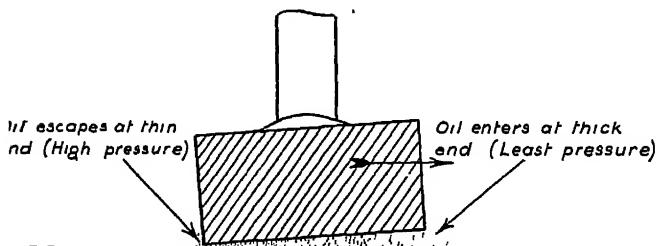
DIAGRAM SHOWING WEDGE-SHAPED OIL FILM
